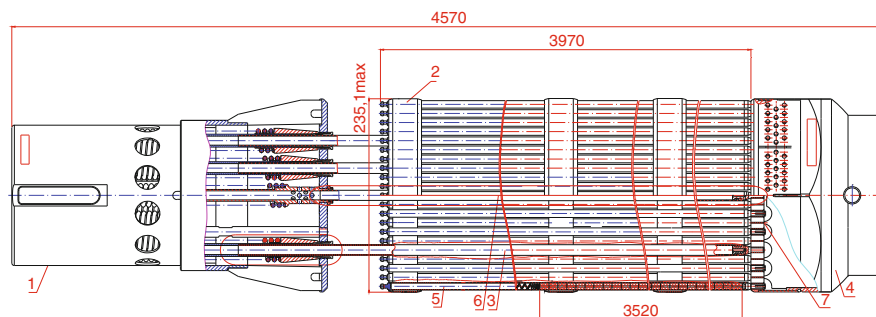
Fuel assembly. 1 – Top nozzle, 2 – Spacer grid, 3 – Guide channel, 4 – Bottom nozzle, 5 – Fuel rod, 6 – Central tube, 7 – Bottom grid
